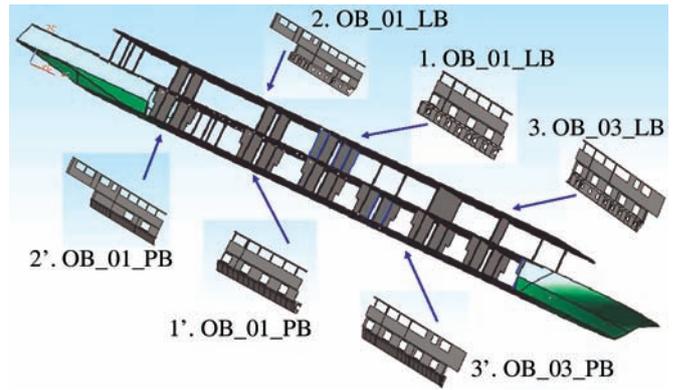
Sequence of assembling bow and stern parts with the bottom and main deck construction.
